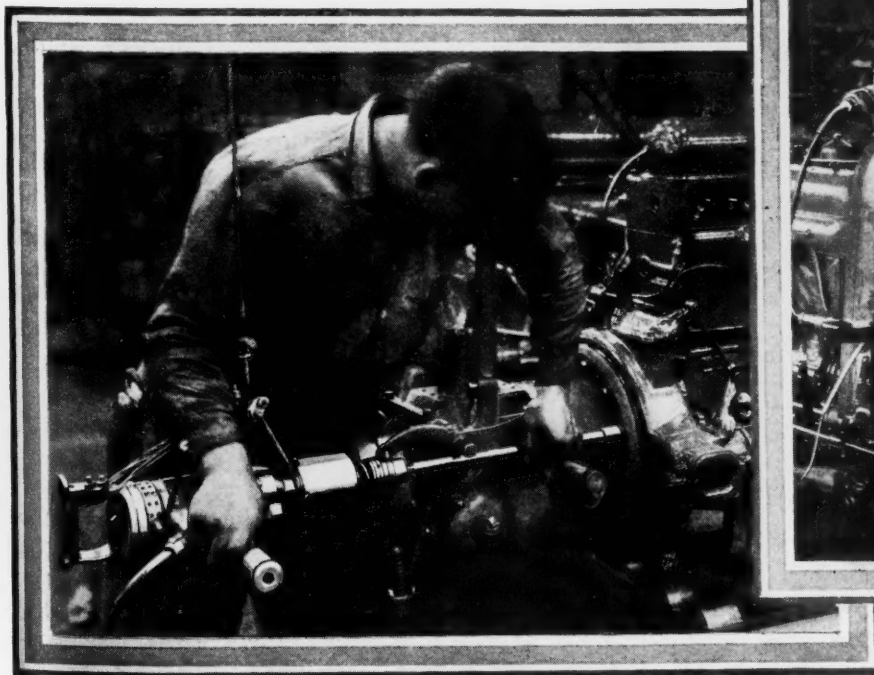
Setting 3/8-inch Cap-screws in Bolting of Transmission Assembly to Motor, Using an Electric Nut Setter with a 24-inch Extension Shank
